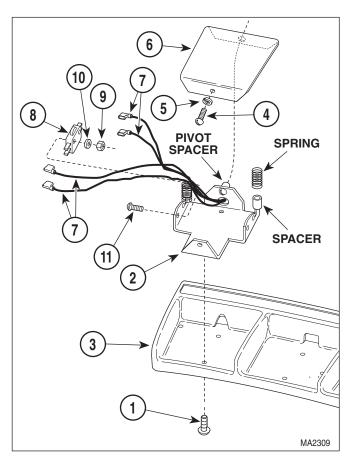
Typical Foot Pedal Foot Switch Removal / Installation
